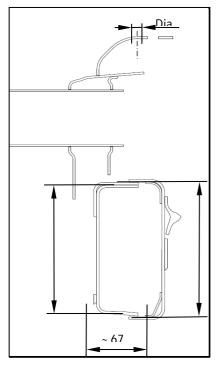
Section Q-Q (Amarok SC)
